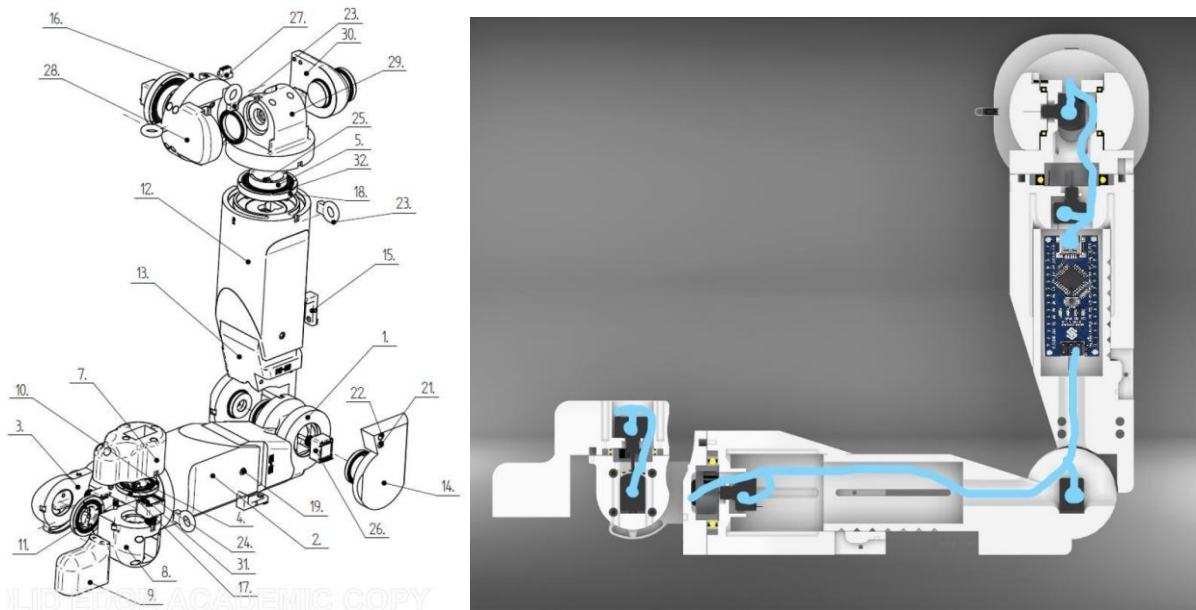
Left: exploded 3D assembly drawing of the dummy upper limb; Right: cross-sectional view of the dummy upper limb with the sensor data processing microcontroller board
